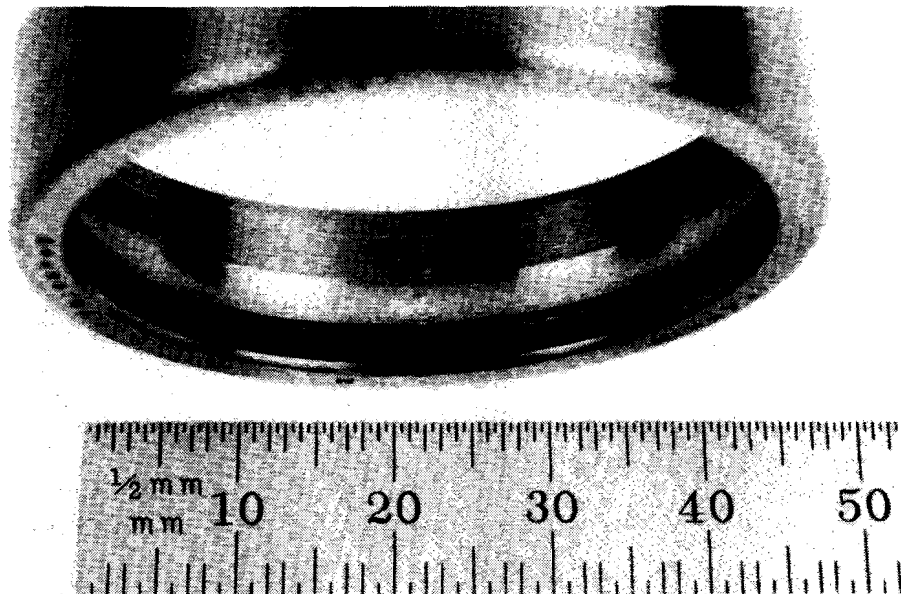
90-Degree Gearbox -410 Bearing Outer Race C/D Fault, Runs 8A + 8B
